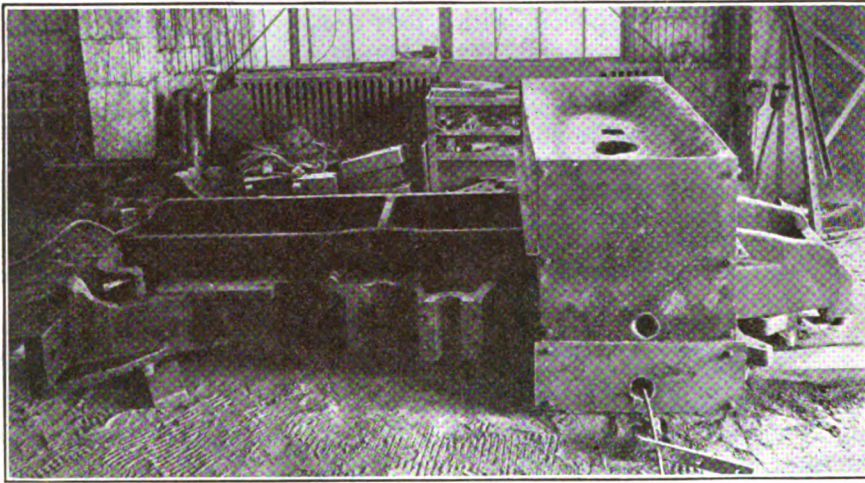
THE MOLD BOX, AND PREHEATING TORCH IN PLACE READY TO PRE-HEAT THE MOLD
